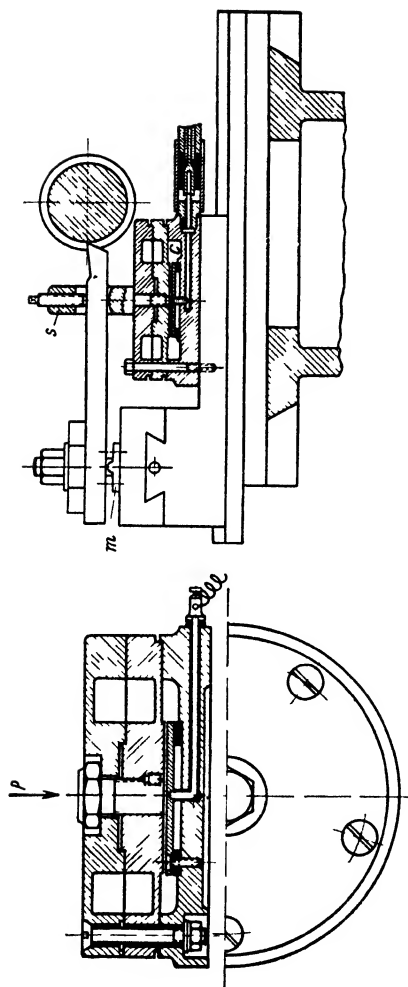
CONDENSER BOX AND ITS ASSEMBLY ON SUPPORT FOR THE MEASUREMENT OF CUTTING PRESSURE
